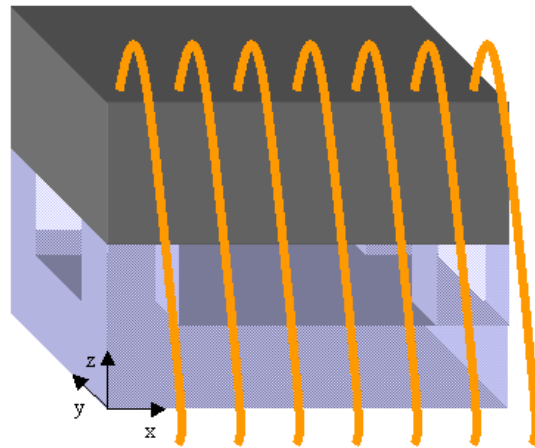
The chip placed on the glass carrier and the bond wires connecting the chip to the PCB.
